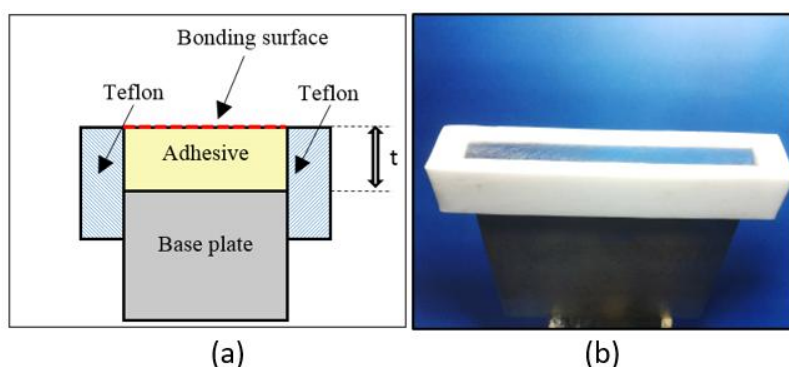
(a) Schematic of fixture and (b) Assembled Teflon jig.
